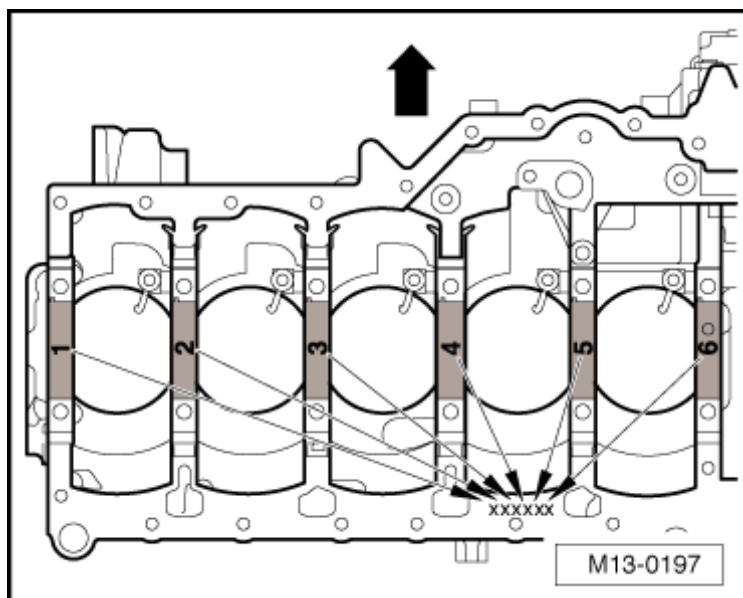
Identification Of Top Crankshaft Bearing Shells
